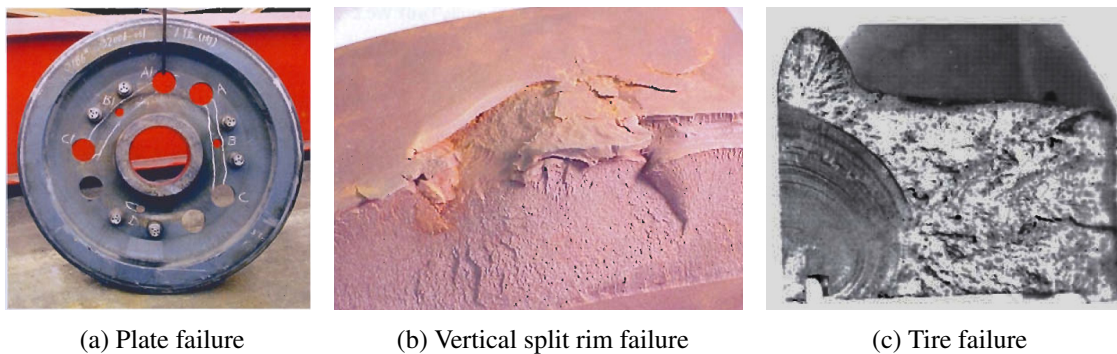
Fatigue defects originated below the wheel surface, [8].
